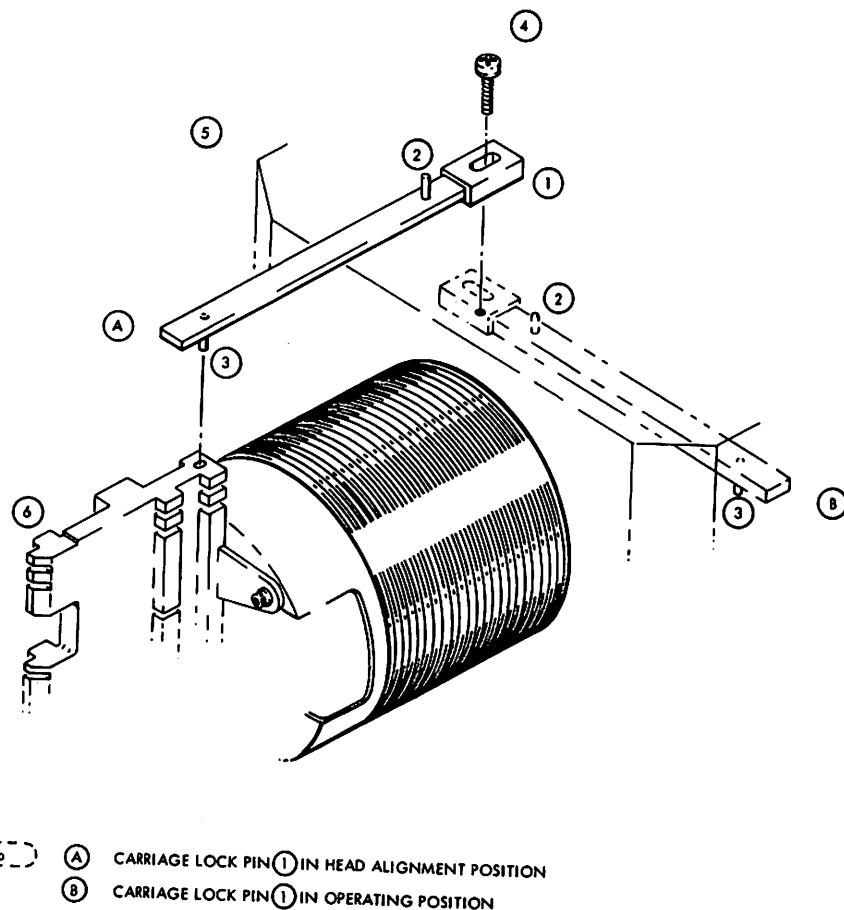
CARRIAGE LOCKING TOOL-HEAD ALIGNMENT POSITION
